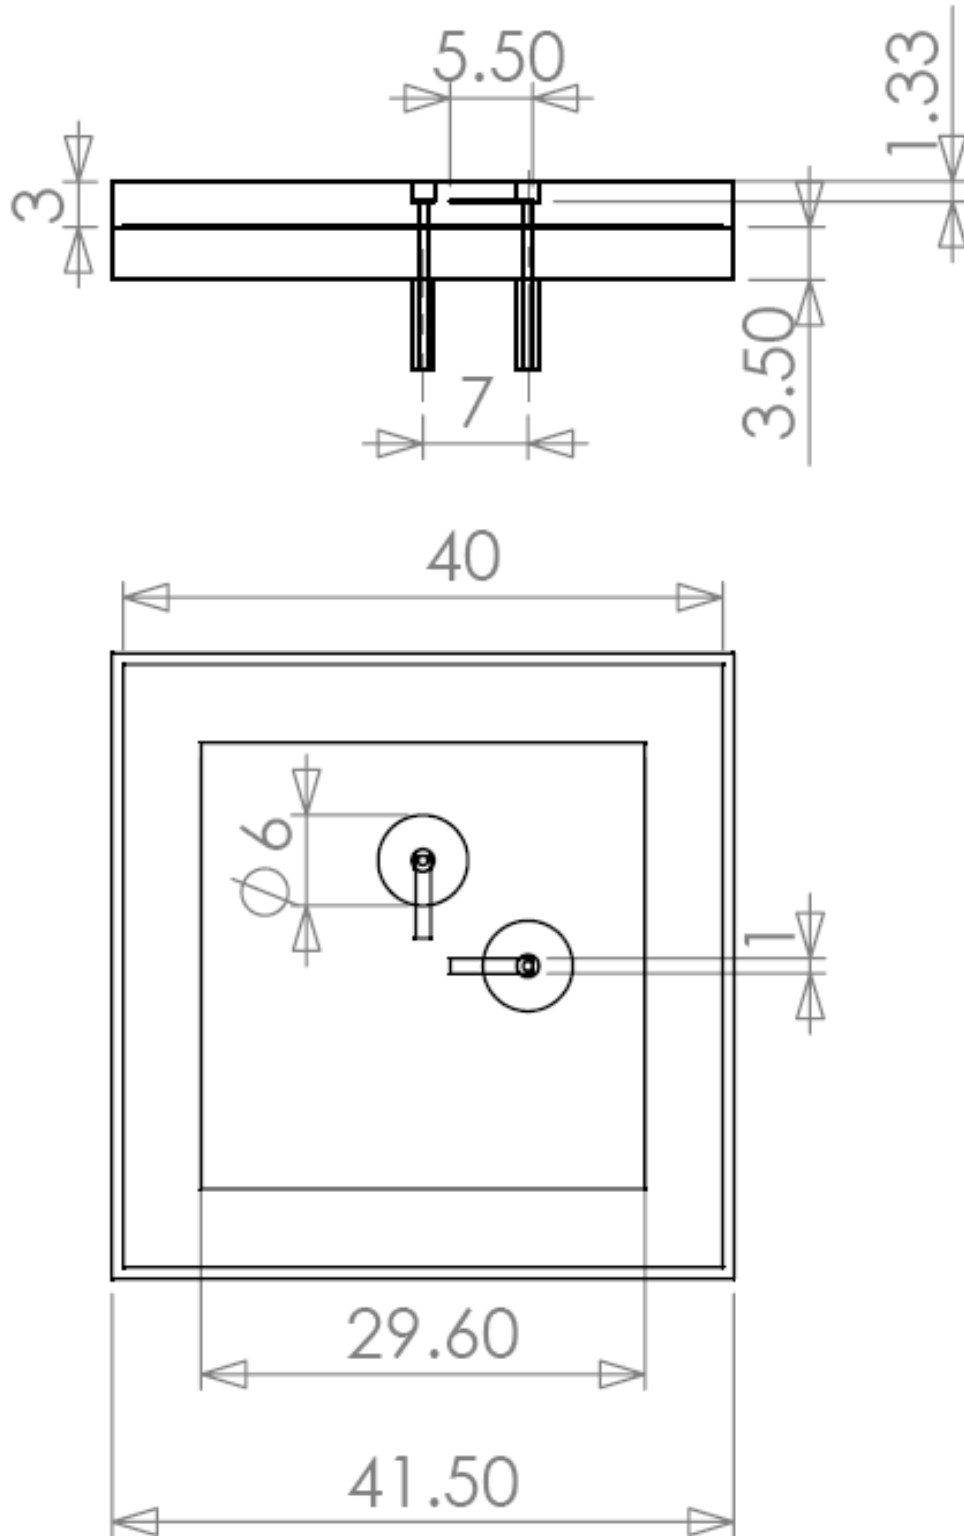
Drawing of the circularly polarized, stacked patch prototype GPS antenna. Horizontal “L” probes are 1mm×5.5mm. All dimensions are in millimeters.
